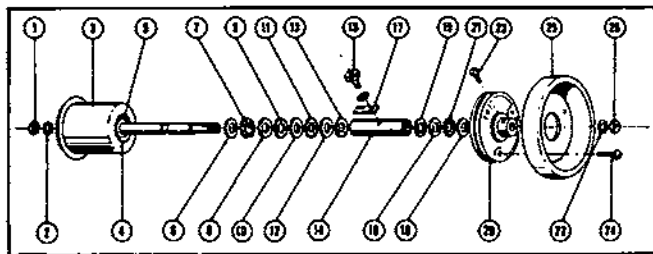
SHIM PROCEDURE FOR ASSEMBLING TURNTABLE SHAFT
